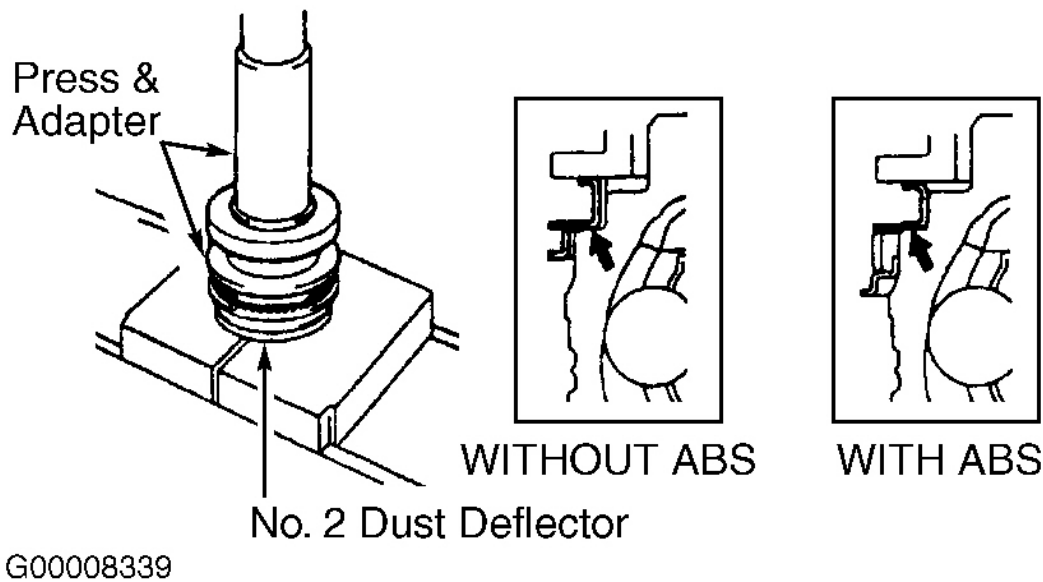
Installing No. 2 Dust Deflector On Rear Drive Axle
